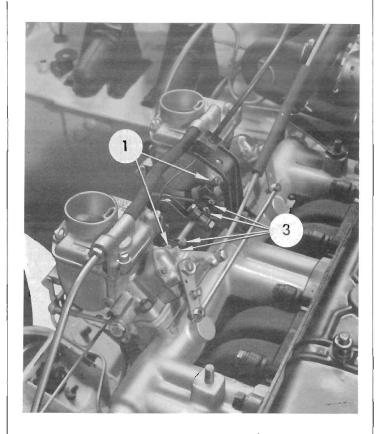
L.H. view of carburettors, showing flexible linkage clamping bolts (3) and throttle stop screws (1)
